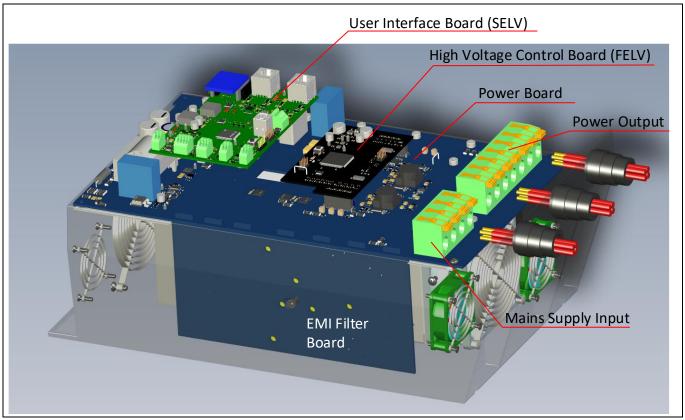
Inverter Construction Scheme (front-left view), Housing removed
